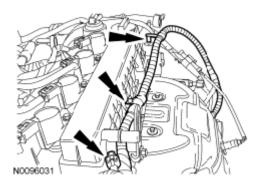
Locating Wiring Harness Retainers Of Valve Cover Stud Bolts Courtesy of FORD MOTOR CO.
